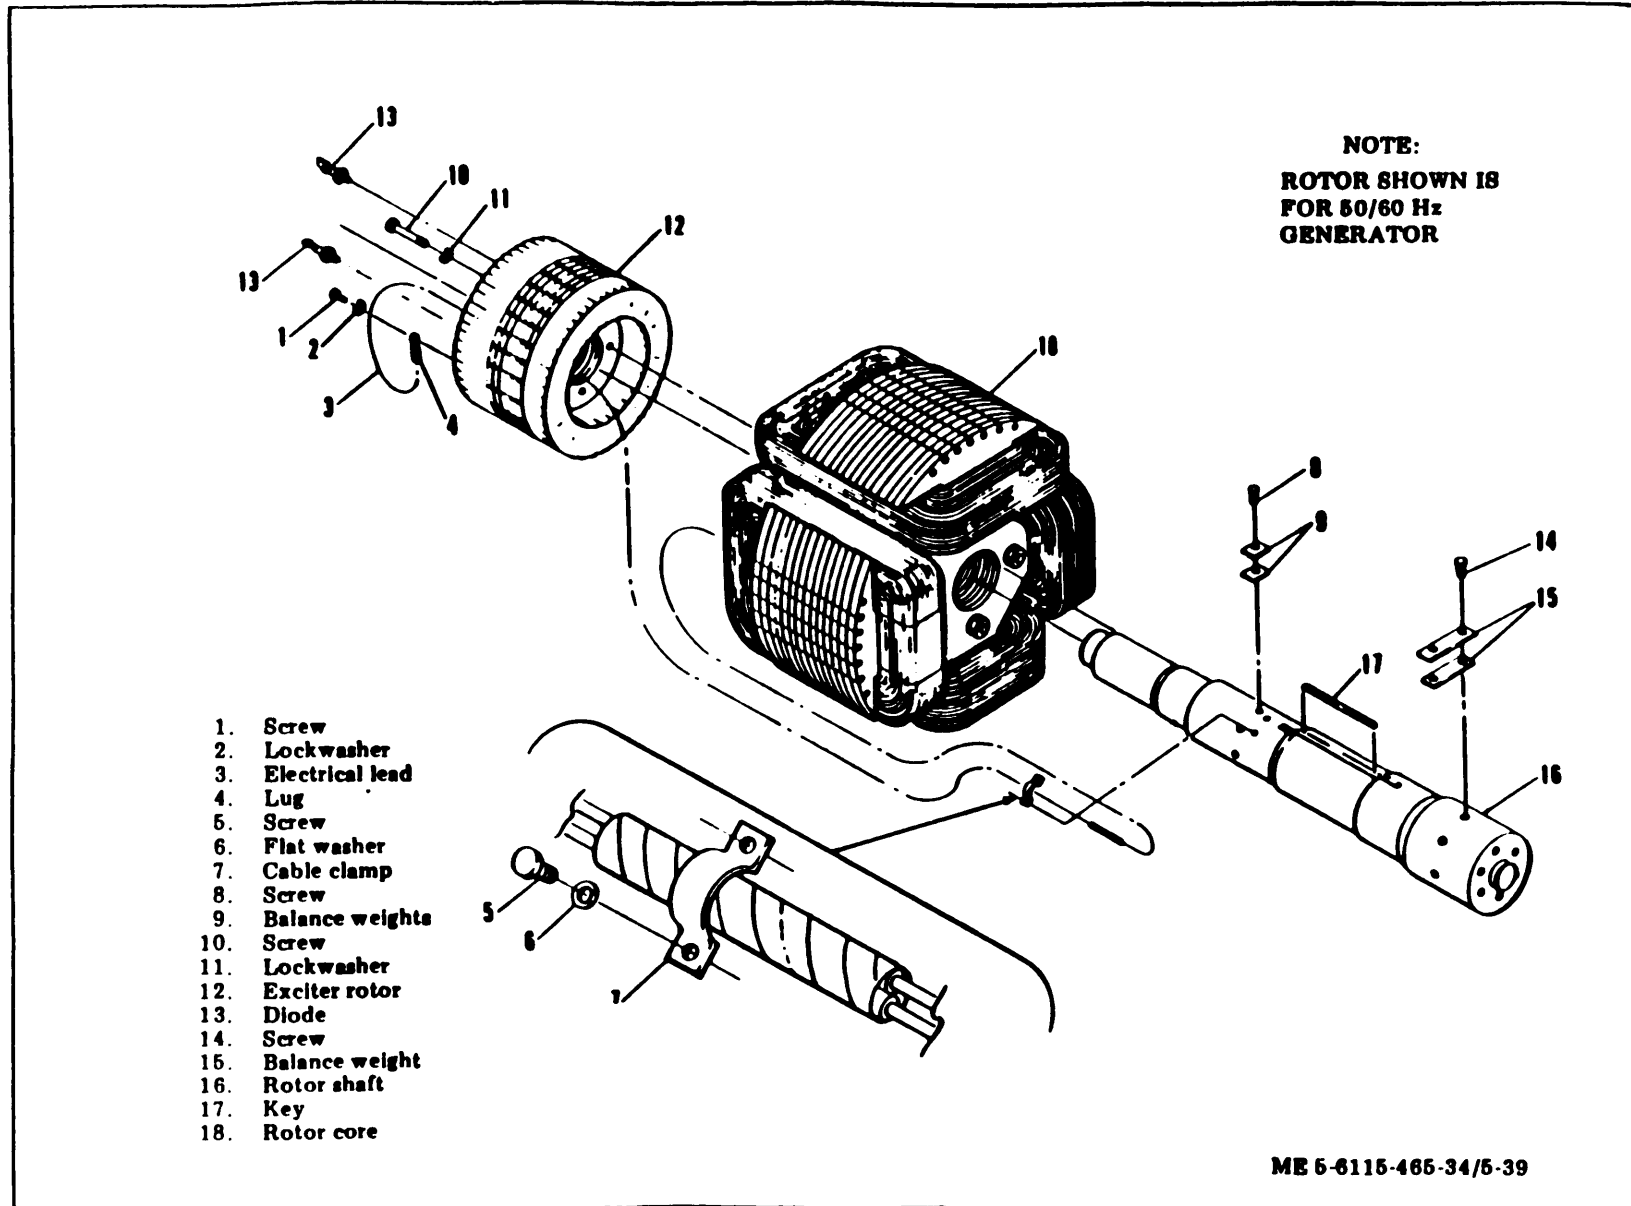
Generator Rotor and Balance Assembly, Exploded View (sheet 1)
